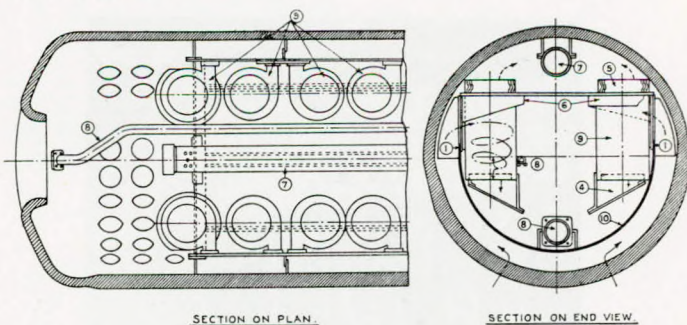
Arrangement of steam drum fitted with Babcock & Wilcox cyclone steam separators. (1) Inlet; (2) entrance plate; (3) vane outlet; (4) splash plate; (5) steam scrubber; (6) brackets; (7) internal steam pipes; (8) internal feed pipes; (9) cyclones; (10) sealing baffle.
